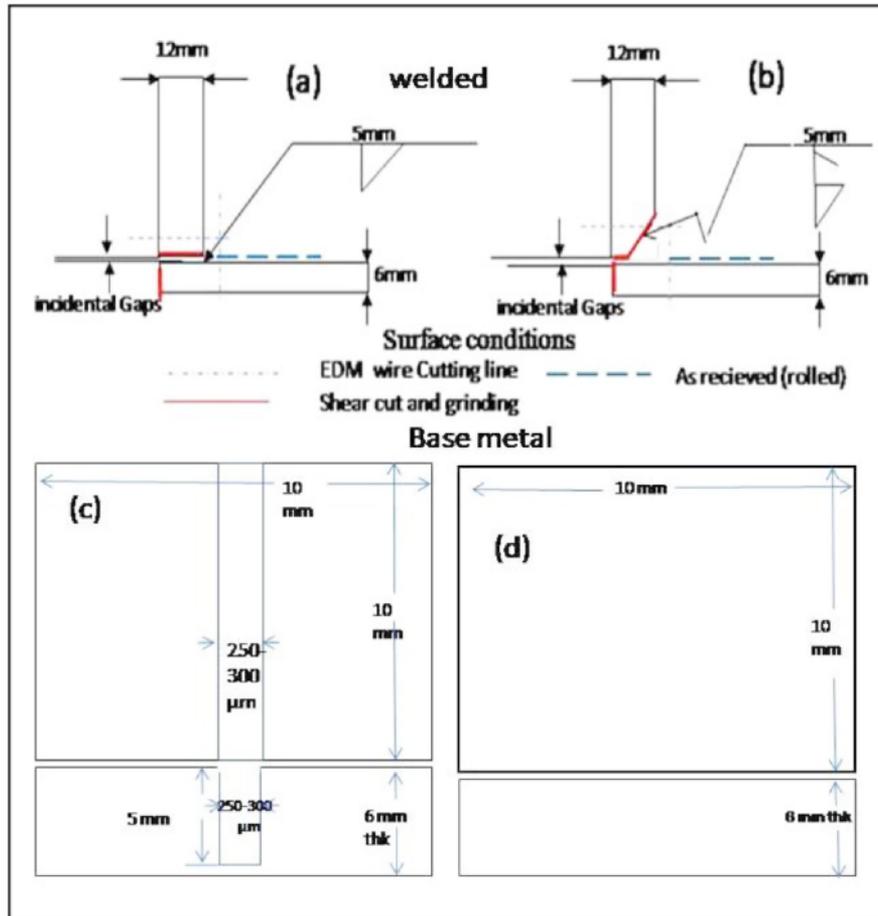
Schematics of specimens designated for corrosion testing, including weld joints with fillet (a), groove fillet (b), and base metal both with (c) and without groove (d).
